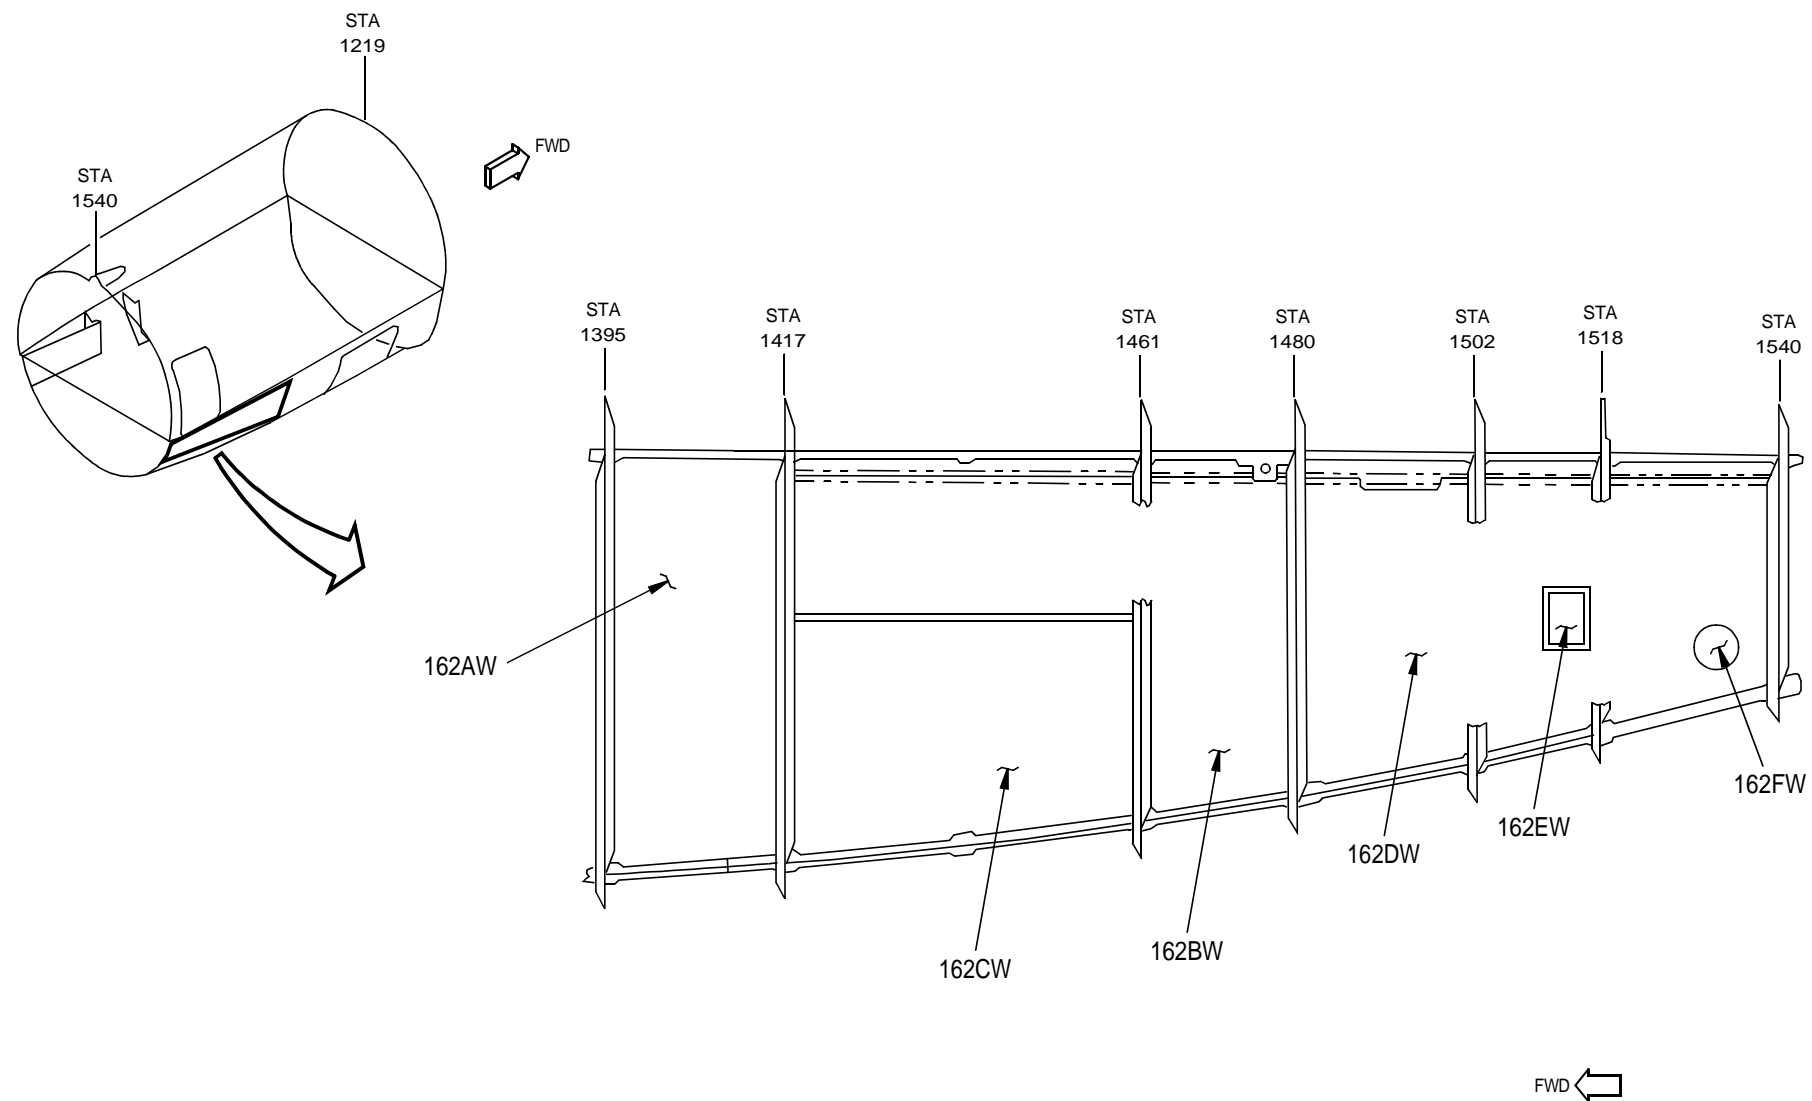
SUB-MAJOR ZONE 162 BULK CARGO COMPARTMENT VERTICAL SIDEWALL PANELS - RIGHT
